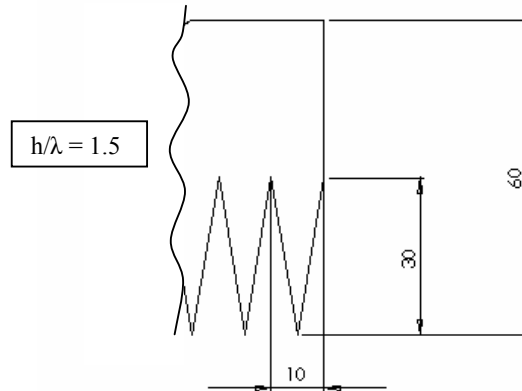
Small Toothed Serration Dimensions (mm)
